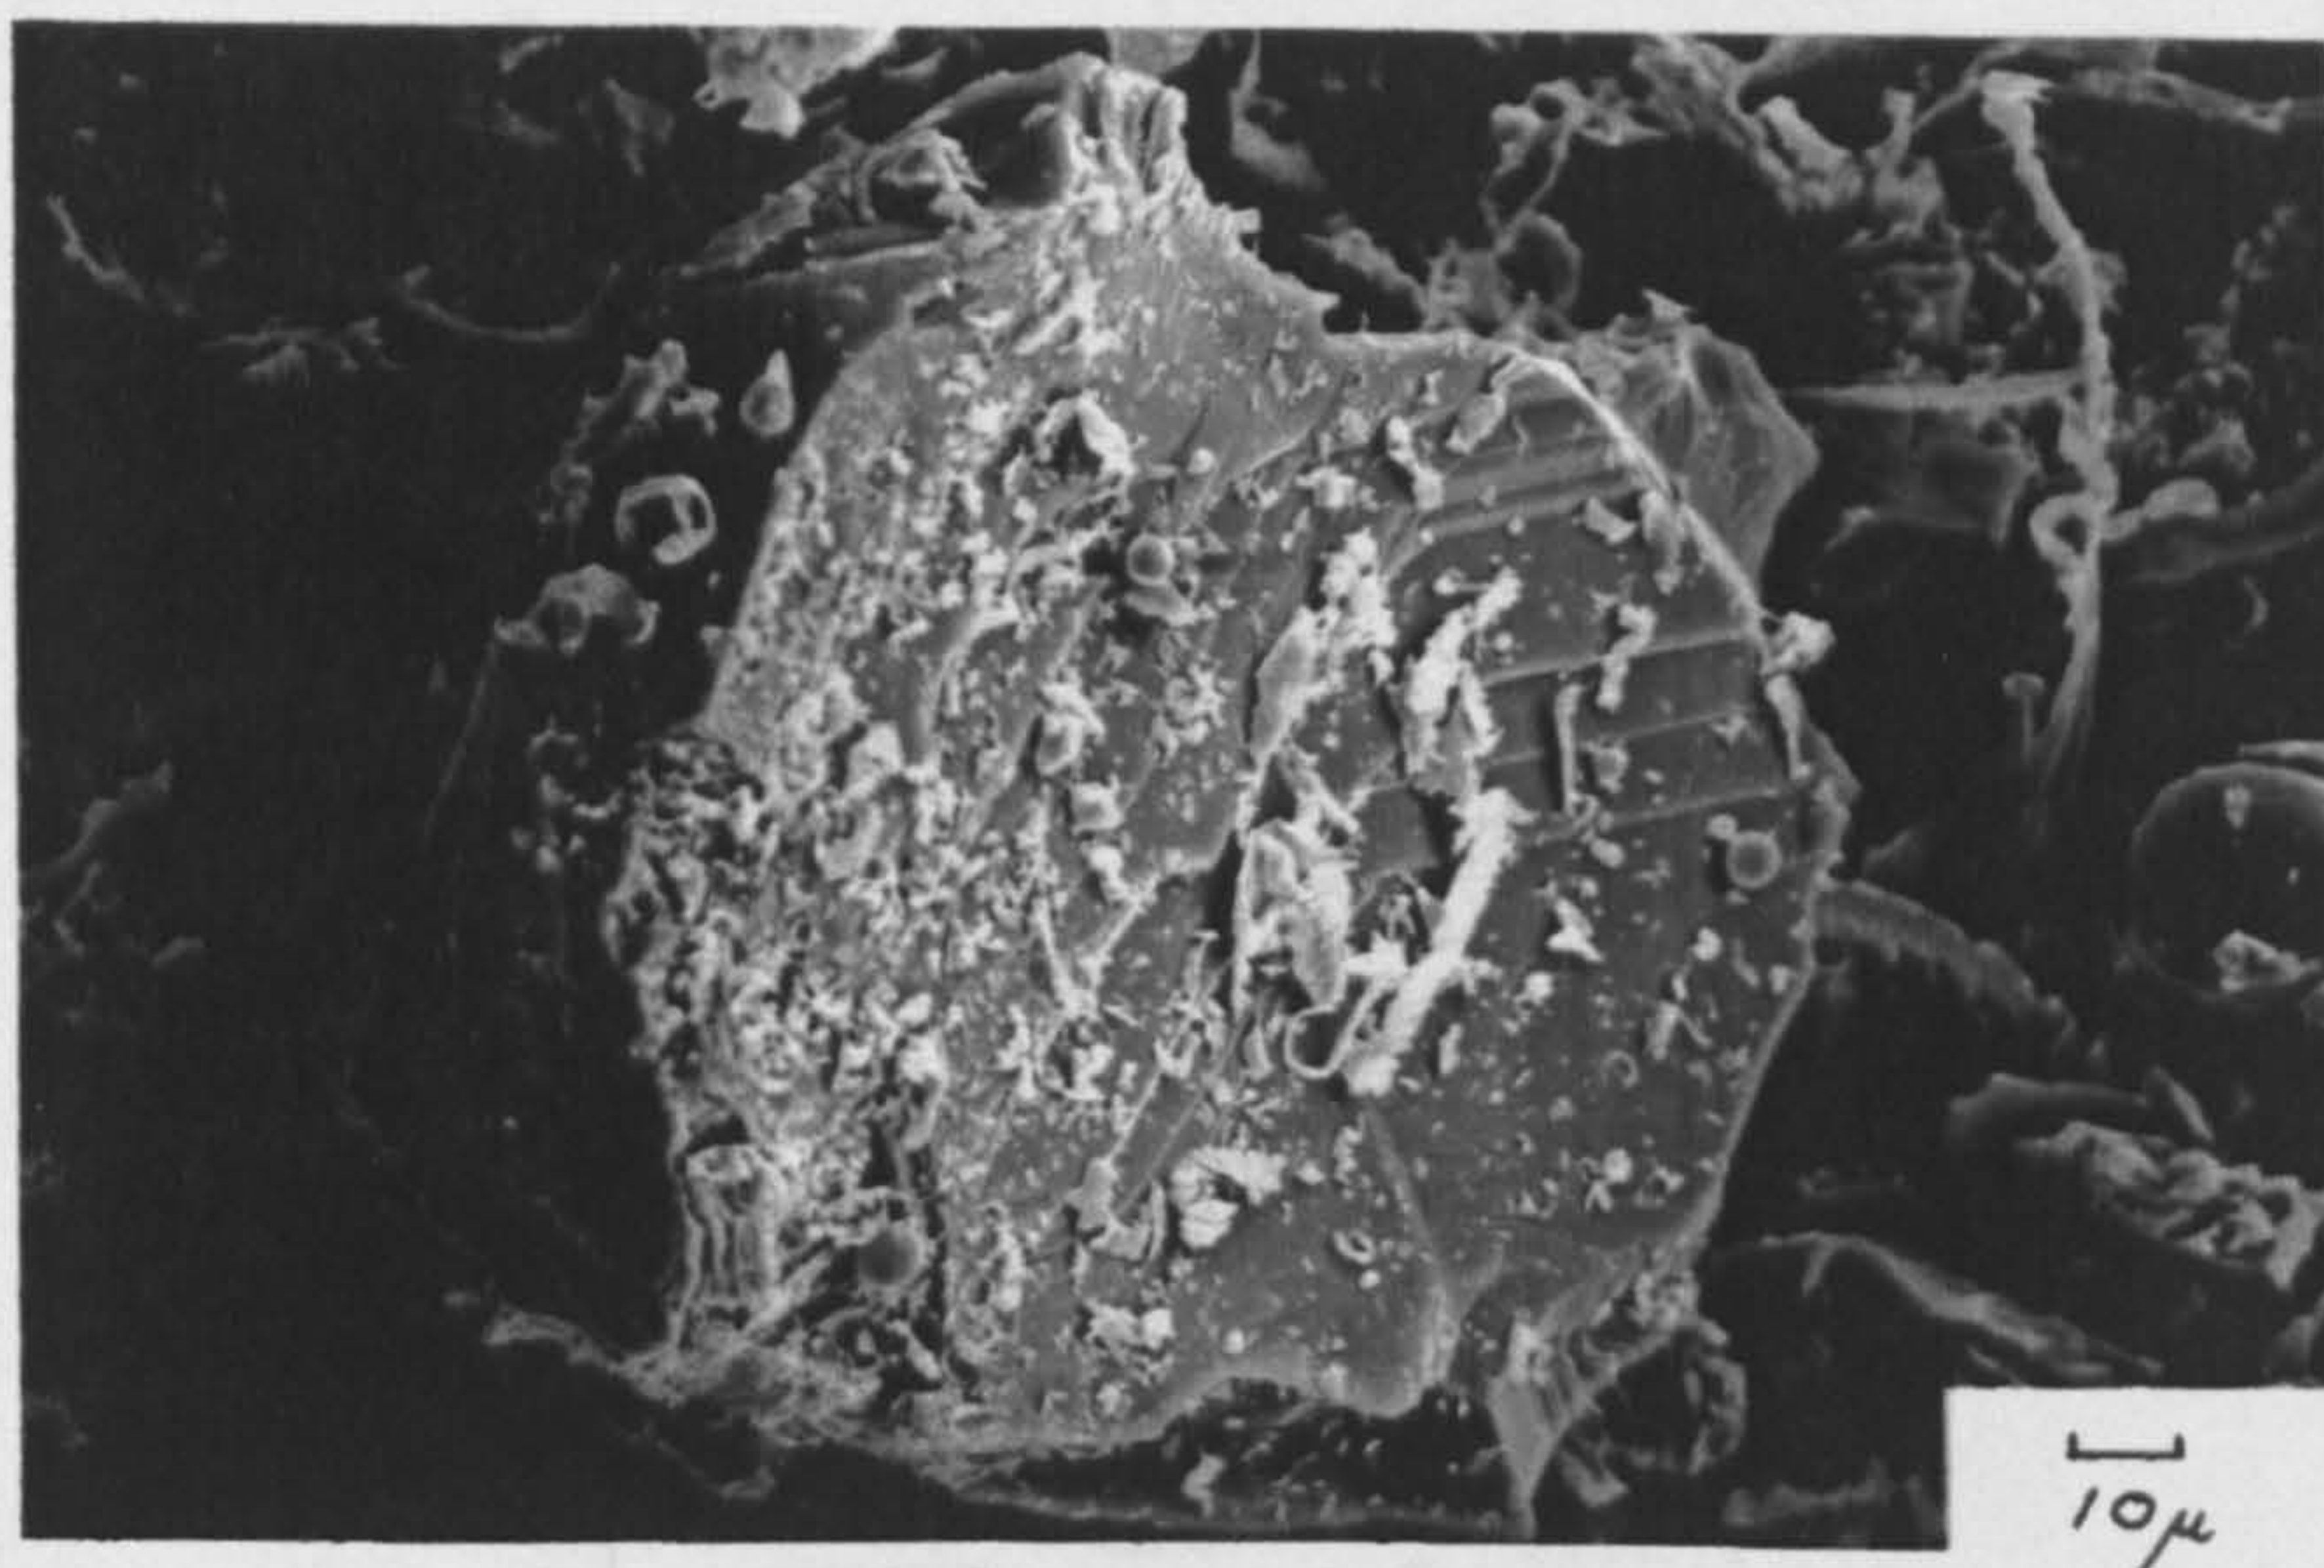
Illustration of grit fracture showing workpiece swarf attached to facets formed by cleavage of the grit along crystallographic planes.
